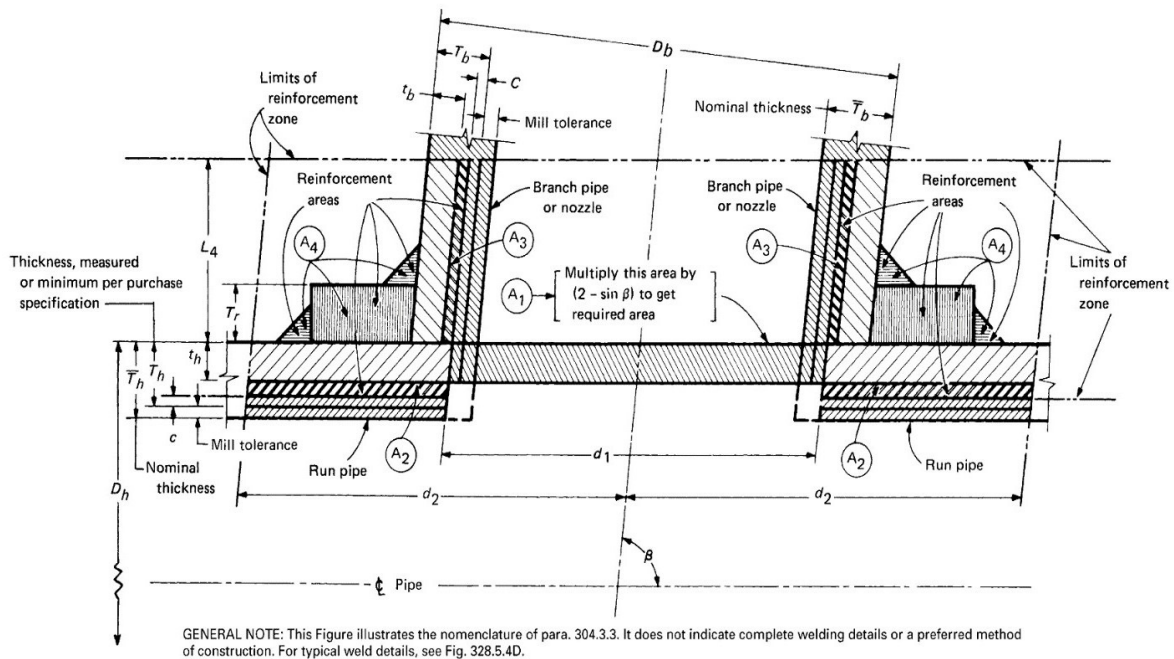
Branch connection reinforcement (ASME, 2002)
